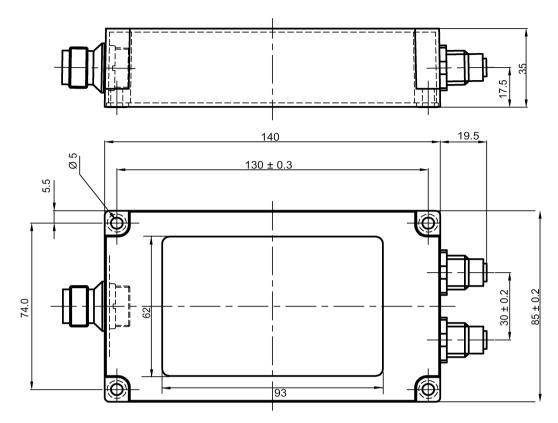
Dimension drawing wide-range power supply unit for SIMATIC RF systems (all dimensions in mm)
